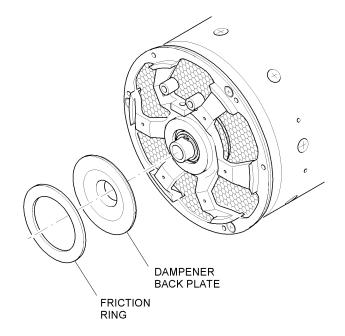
Installing Dampener Back Plate and Friction Ring
